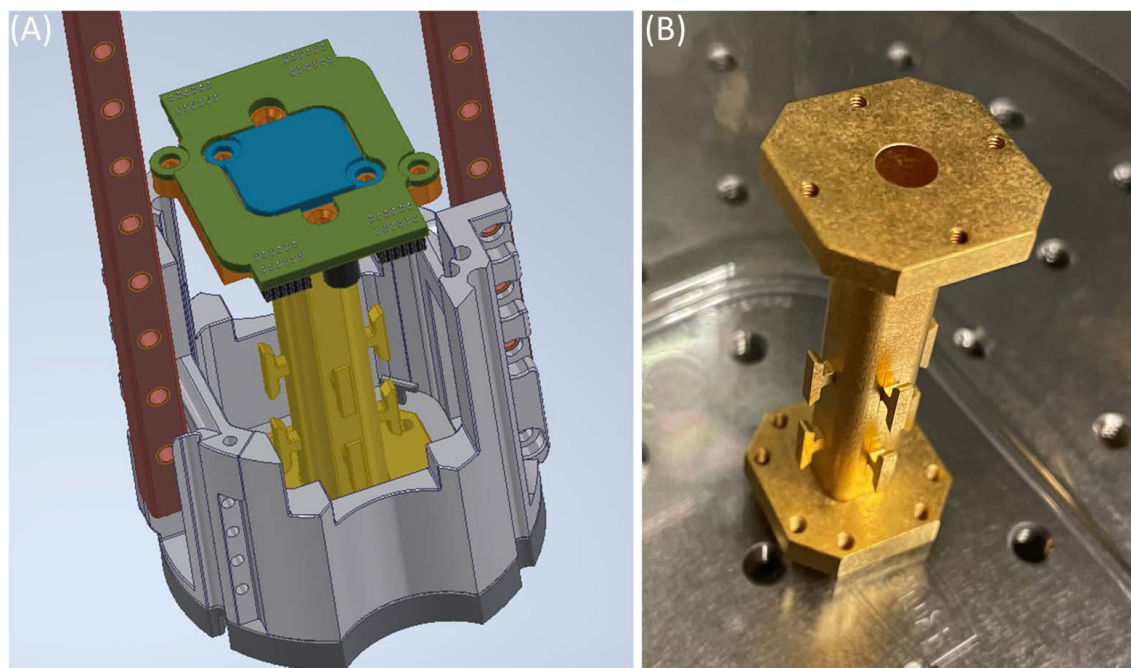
(A) Blank Stage Mount 3D CAD presented in the cage assembly. (B) The blank stage mount machined out of copper and gold plated.
